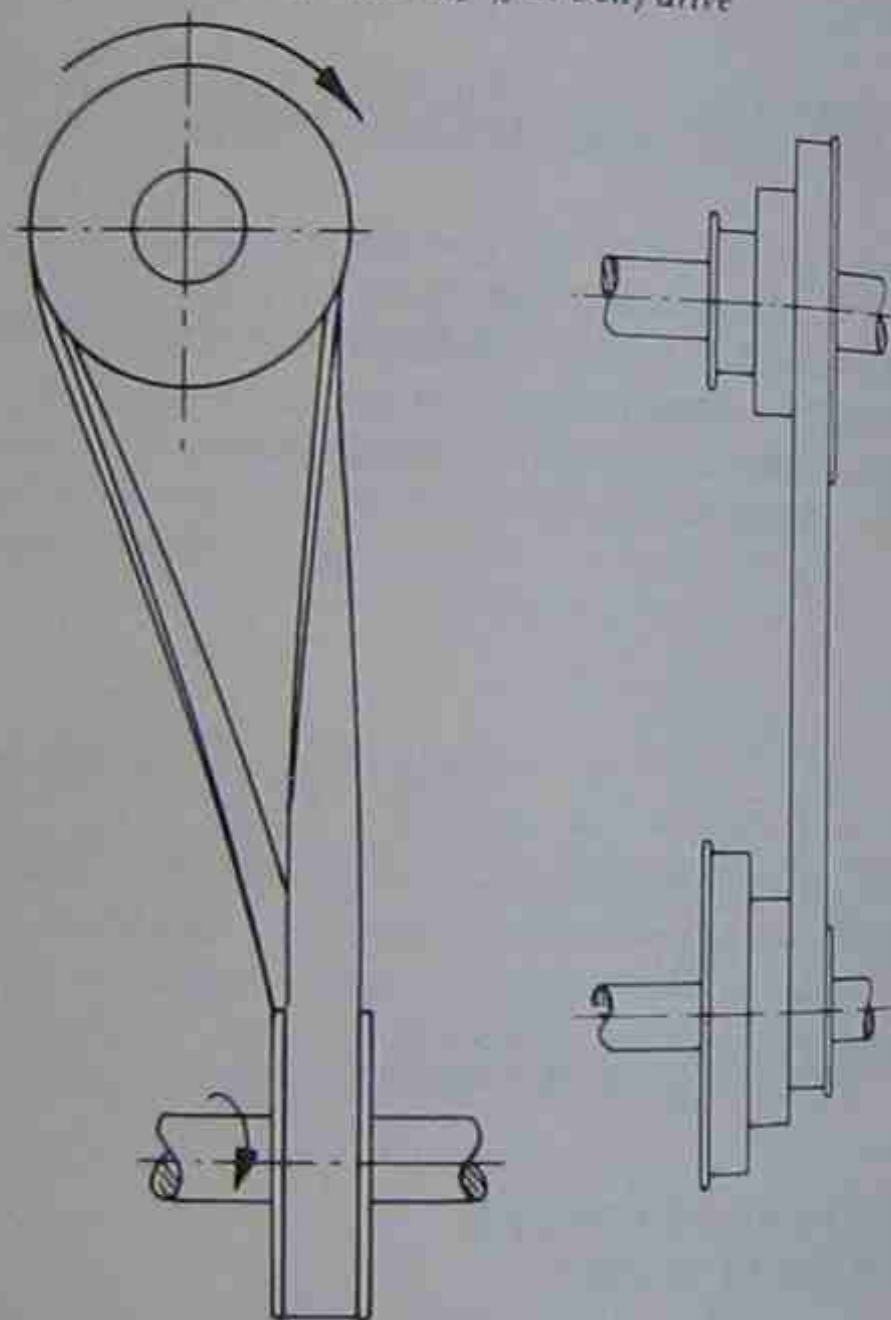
Crossed belt drive (left), and stepped pulley drive
